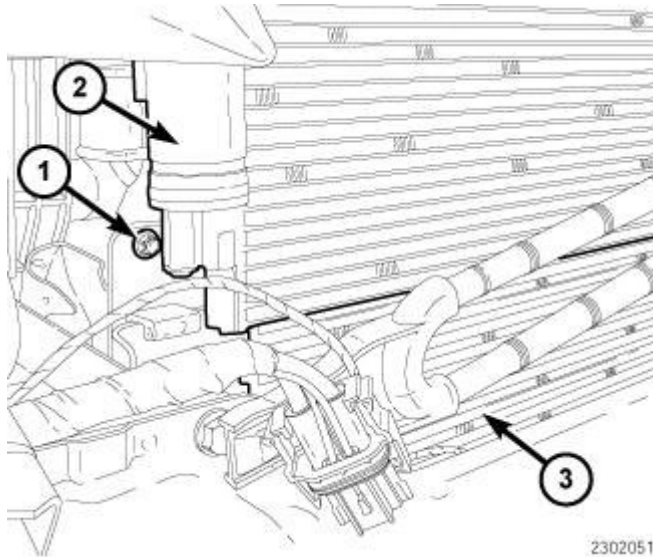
RADIATOR/CONDENSER ASSEMBLY
